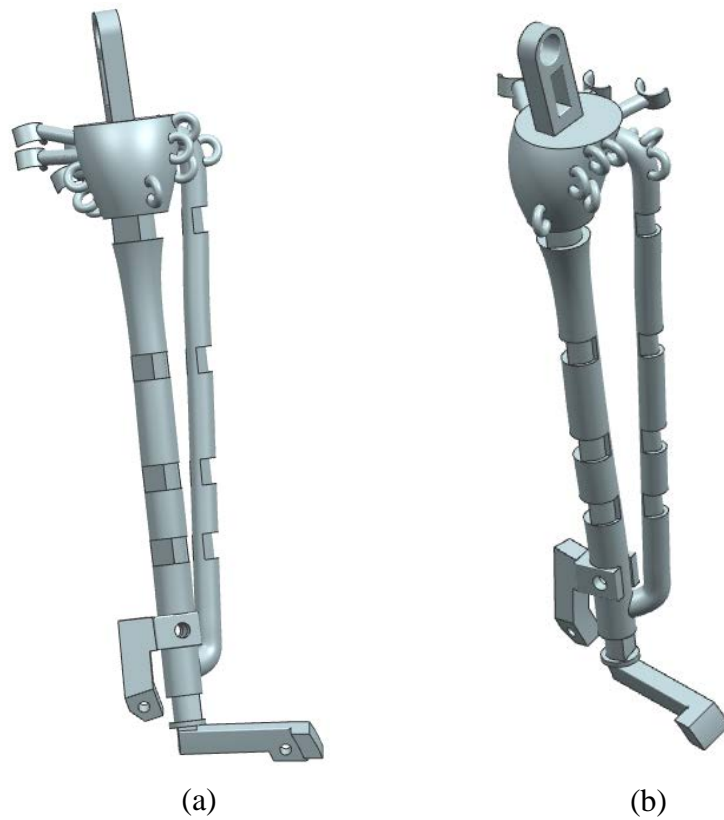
(a) Front and (b) Isometric view of left shank.
